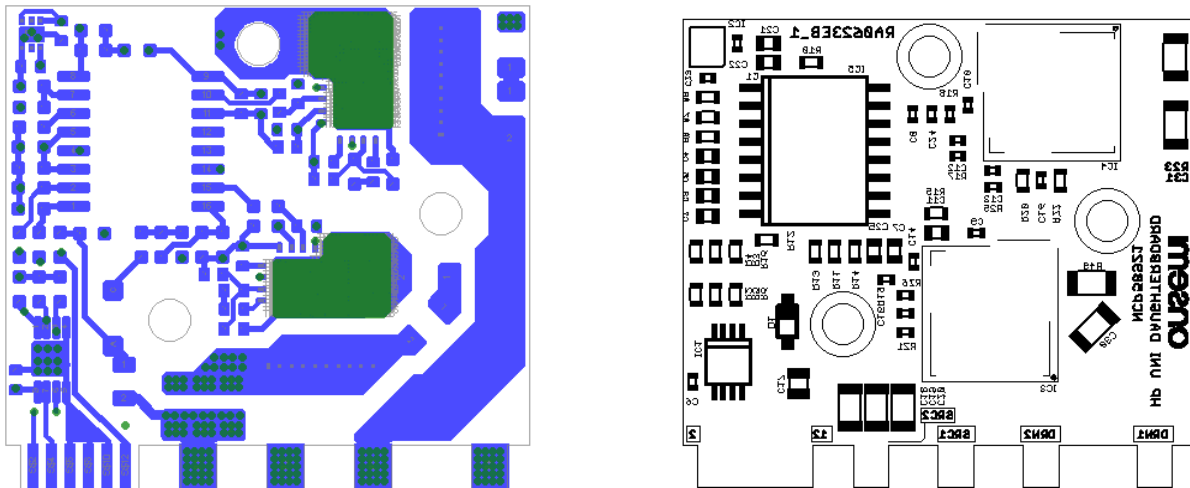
Bottom Layer PCB Layout and Assembly Plan of FAST LEG CARD
